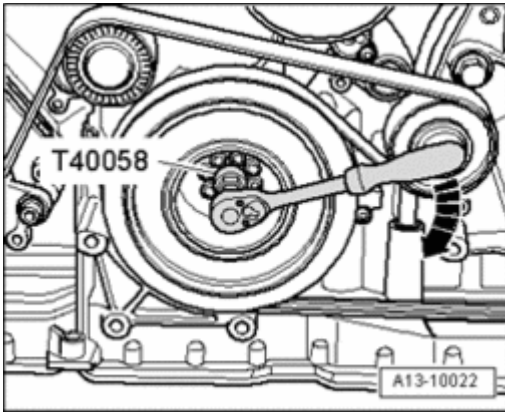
Loosening Torque Converter Bolts Using Adapter T40058
